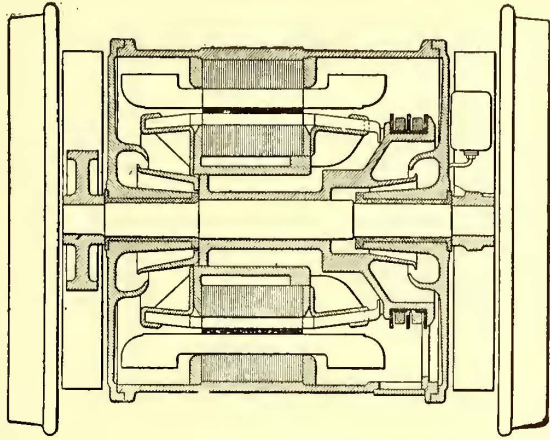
SECTIONAL VIEW OF MOTOR □
